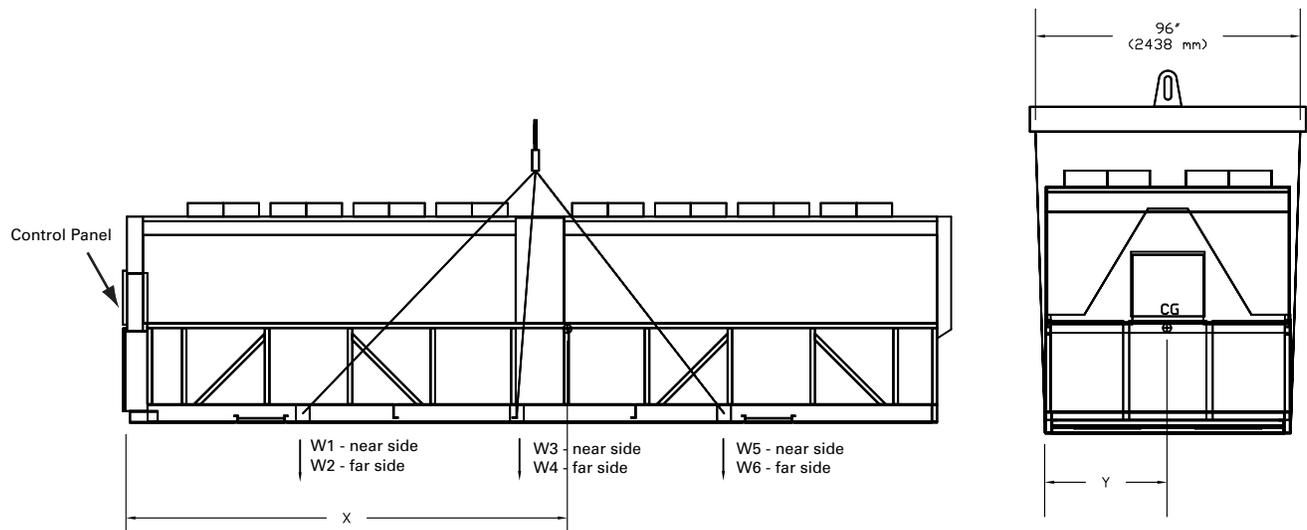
Lifting the unit (packaged and remote) 39-45 foot base
